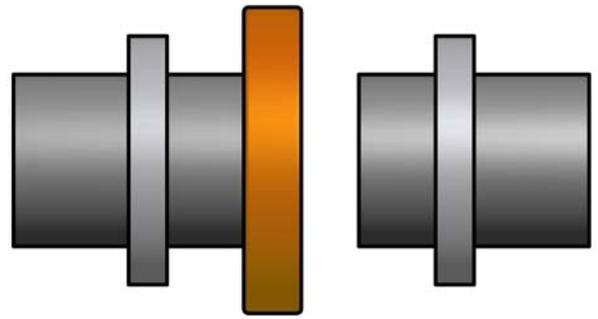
Secure pipe by closing fusion machine clamps
